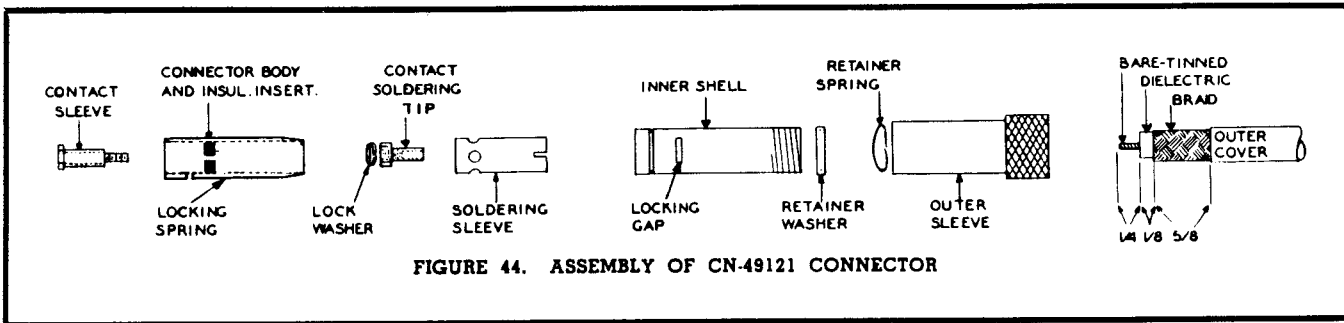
ASSEMBLY OF CN-49121 CONNECTOR
